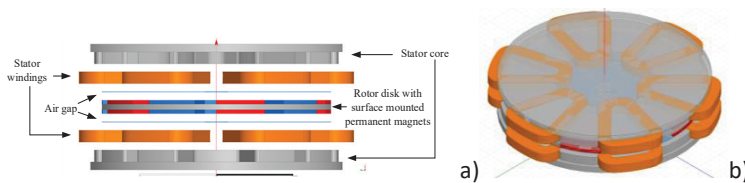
Double-sided AFPMG with two external stators and one internal rotor: a) components of the machine, b) model of the machine
